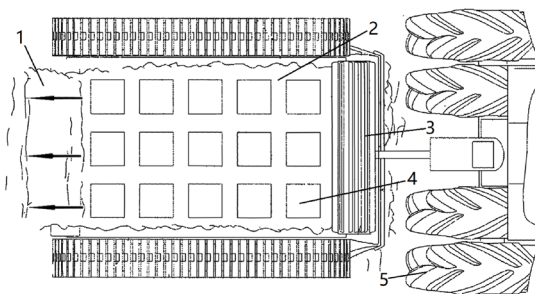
Top view of the soil-removing microwave soil disinfection machine. 1. Soil; 2. Conveyor; 3. Soil excavator; 4. Microwave generator; 5. Drive device
